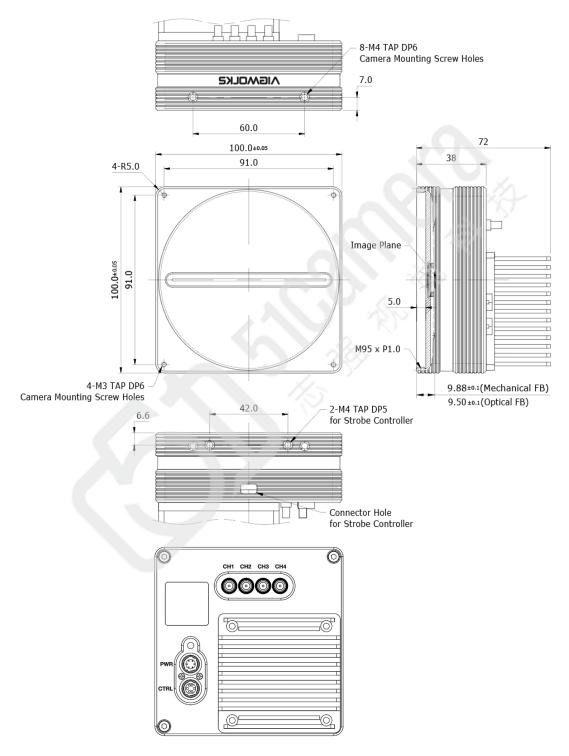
VTS-16K5X2 Mechanical Dimension
